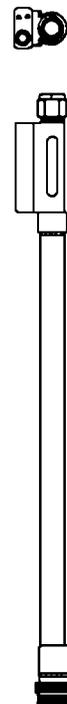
Regulator to Survival Kit Hose Assembly Taping
